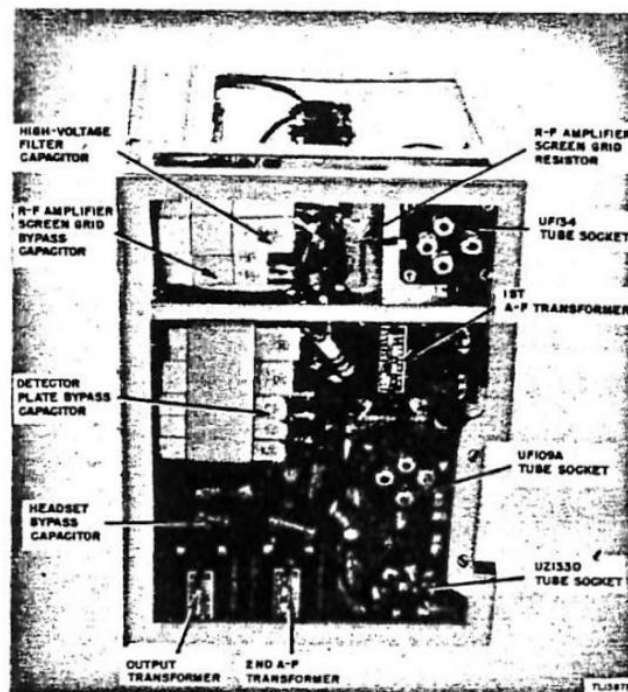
Mark 32 Type Receiver, bottom view of chassis.
